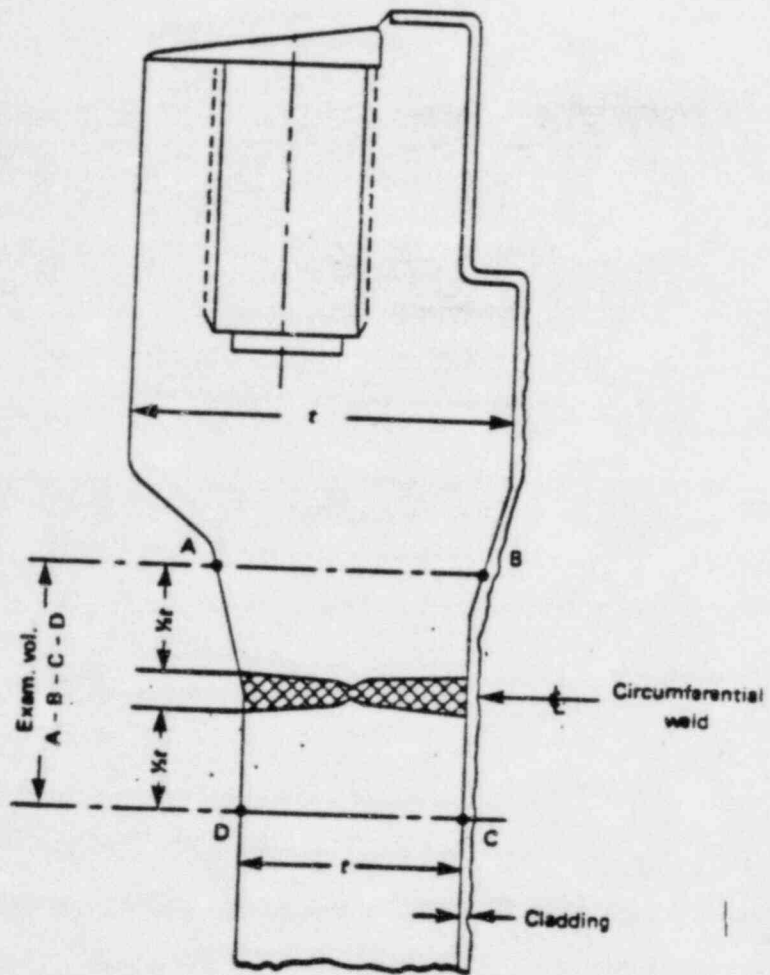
SHELL-TO-FLANGE WELD JOINT
